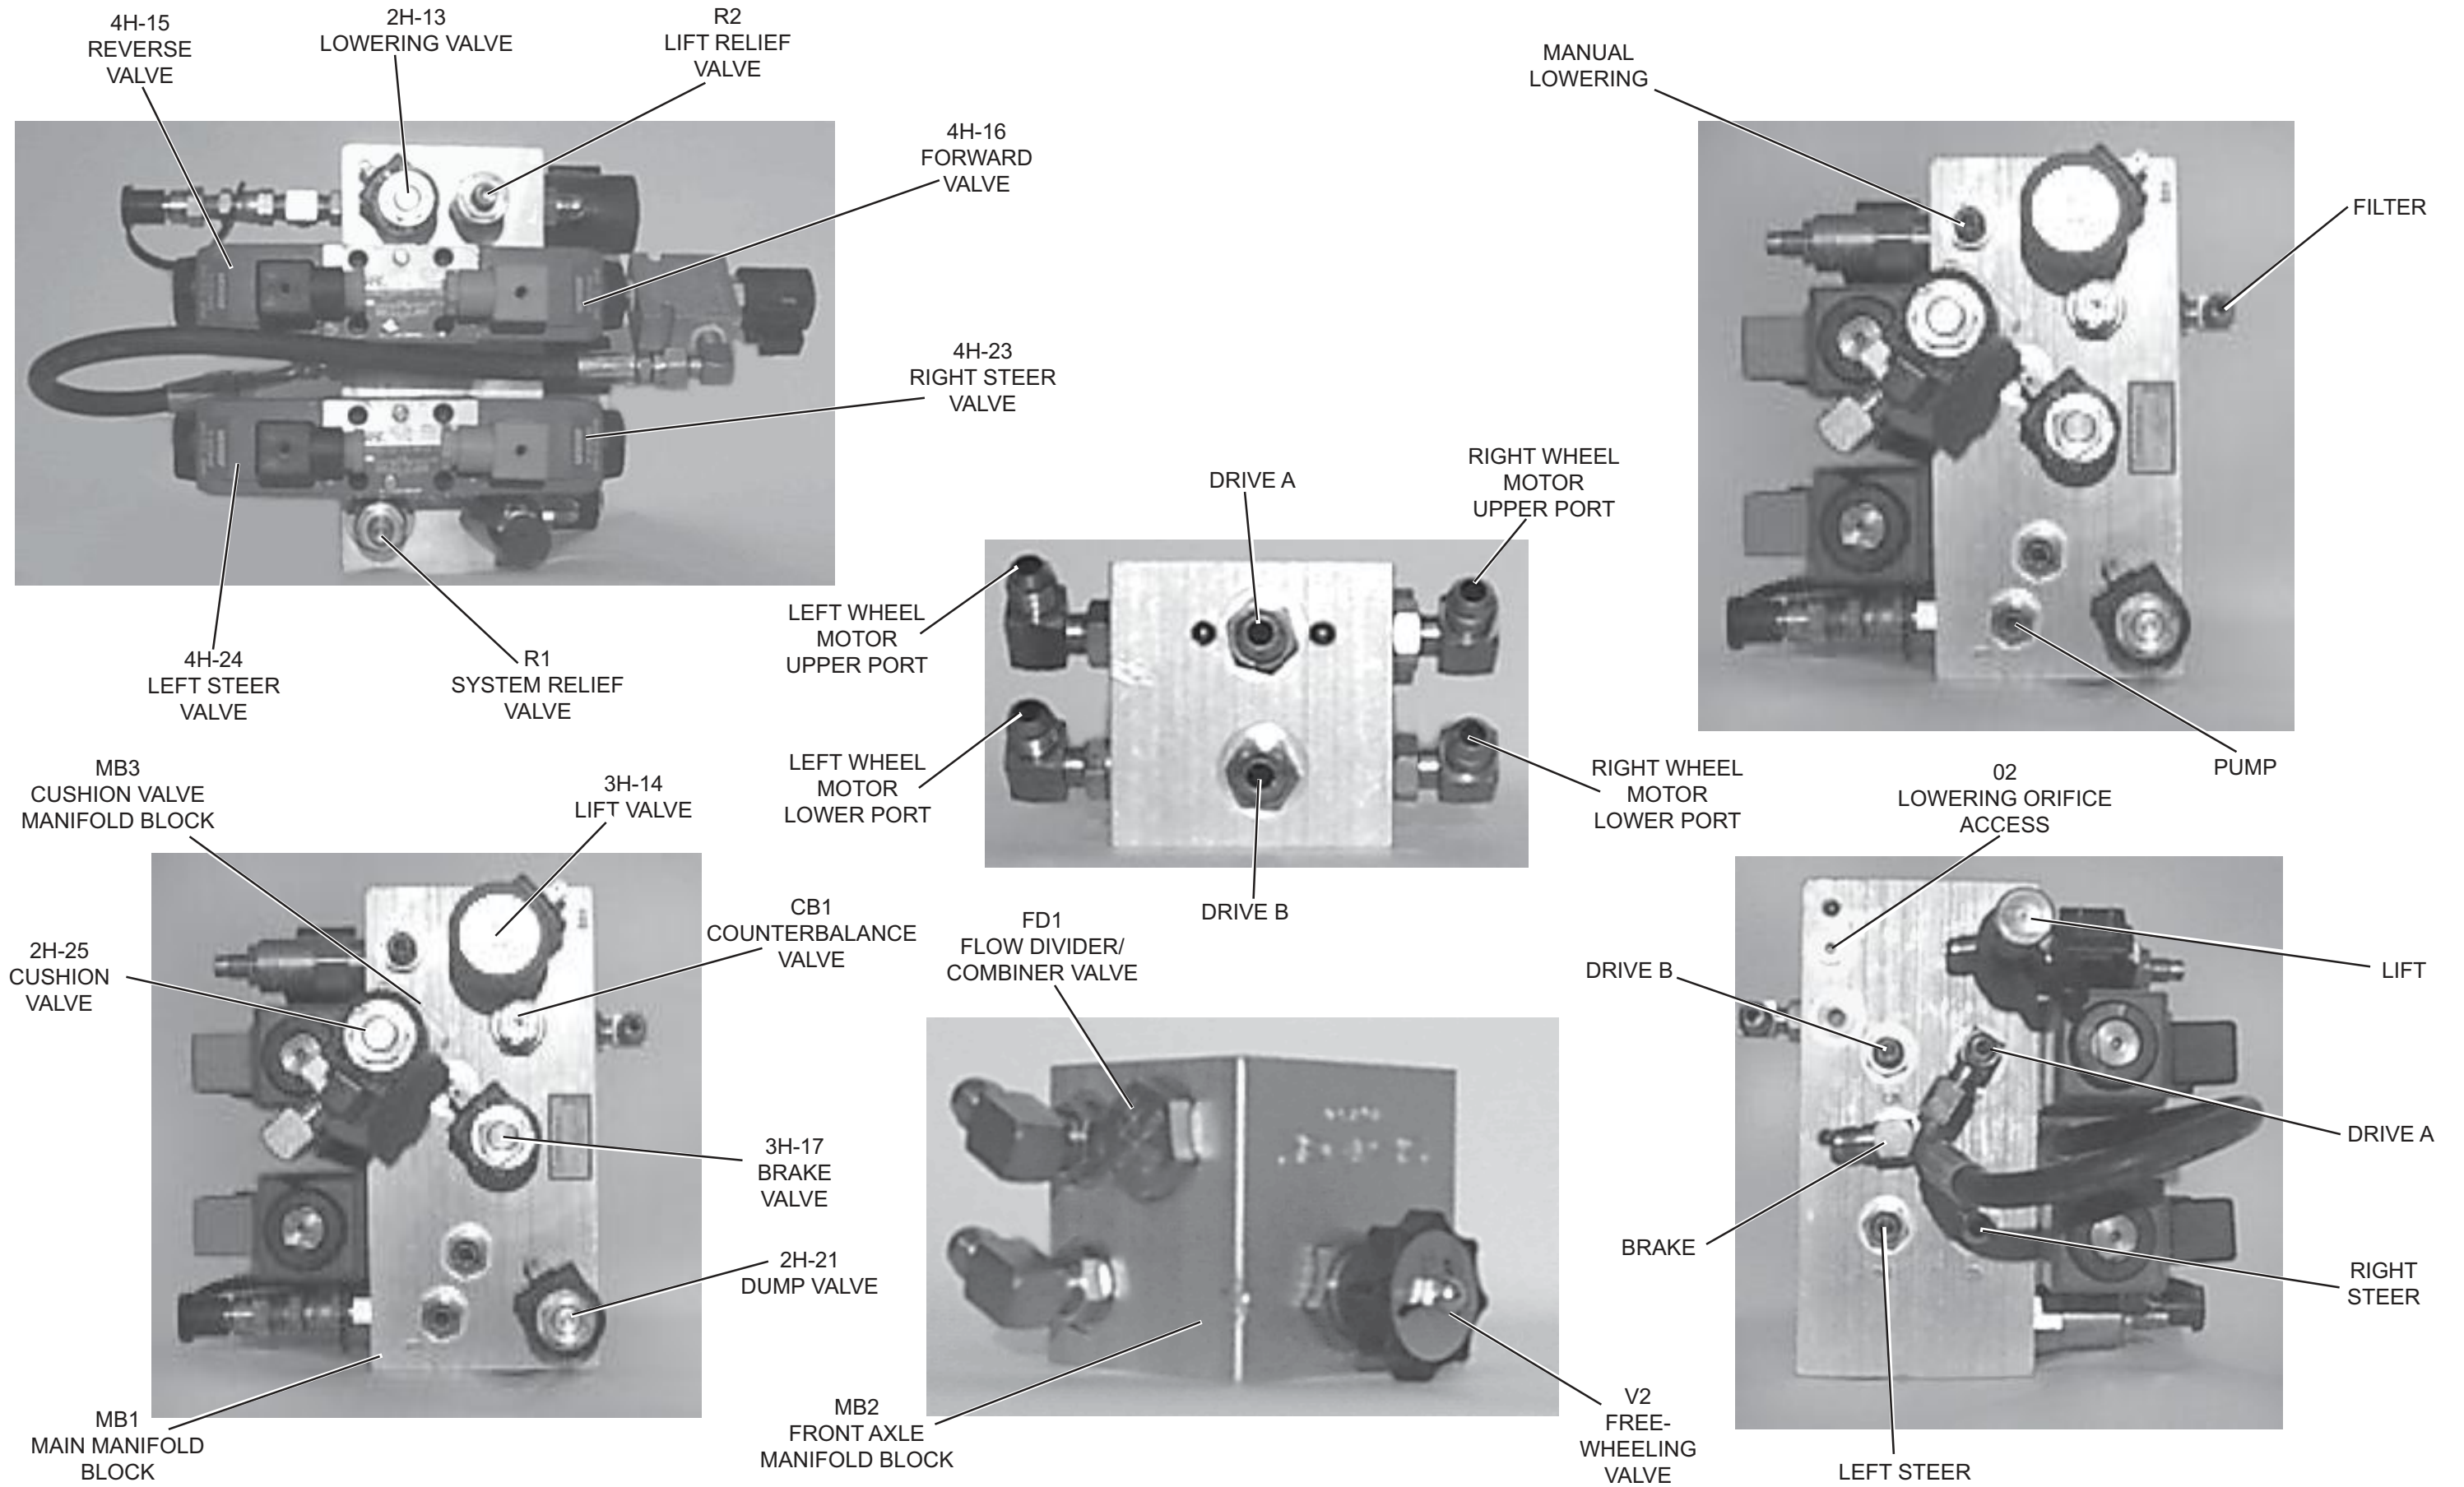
HYDRAULIC MANIFOLD COMPONENT AND PORT IDENTIFICATION (Machines Without Hi-Torque Option)
